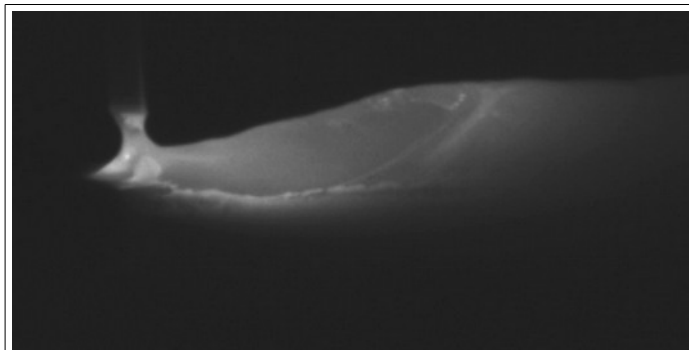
view of the weld pool during the 1st deposit with a SS316L wire of 1.2 mm diameter.
